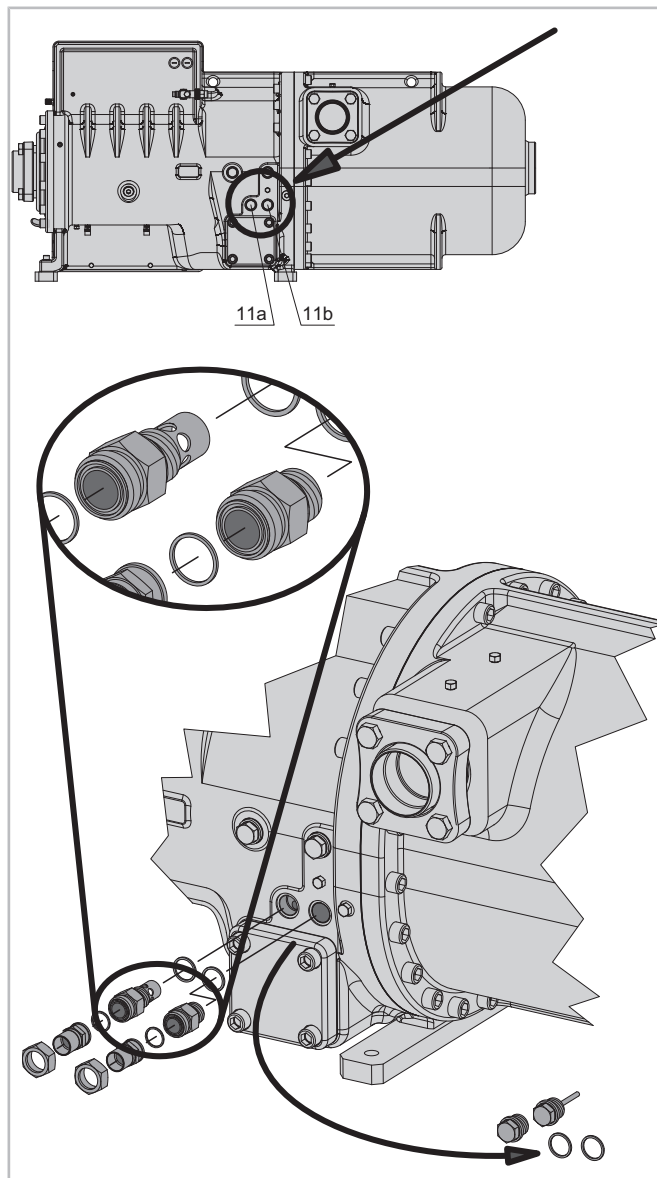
Special adapter kit for connecting the external oil cooler for CSVH2 and CSVH3
